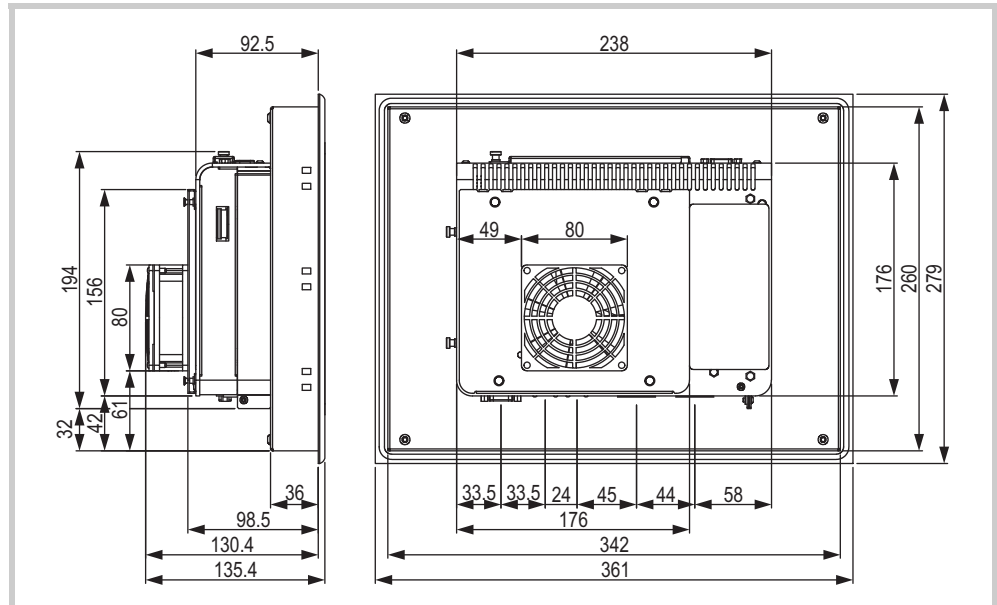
Mechanical dimensions of the 12.1" devices in mm
